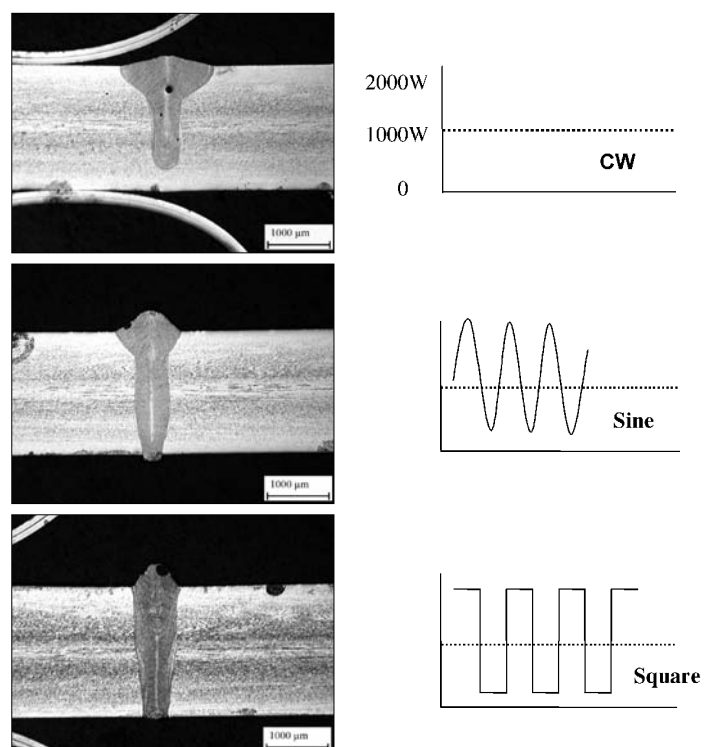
Weld shape profile at 3m/min welding: (top) CW; (middle) sine wave; (bottom) square wave
